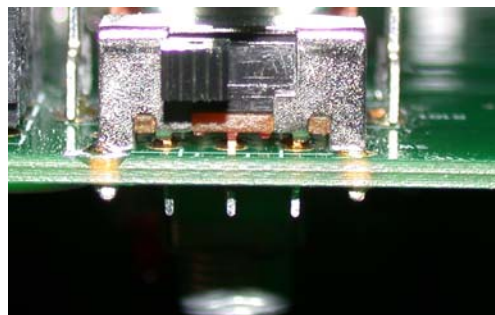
Make sure SW1 is flush with PCB before soldering.
